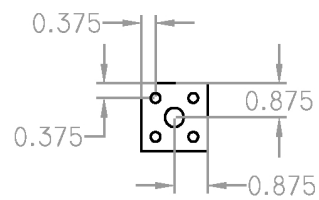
(continued). Blueprints of the parts used to build the second version of the heat flow measurement device with a single central hole: (d) handle. Dimensions are in inches.
